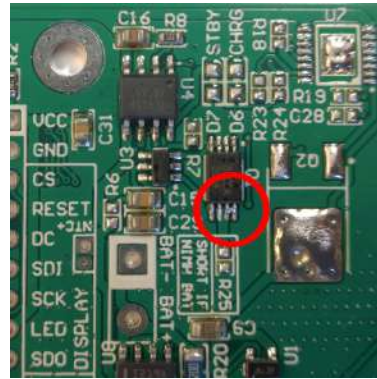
(#) illustrates some areas of the PCB after correcting the previously numbered defects.
